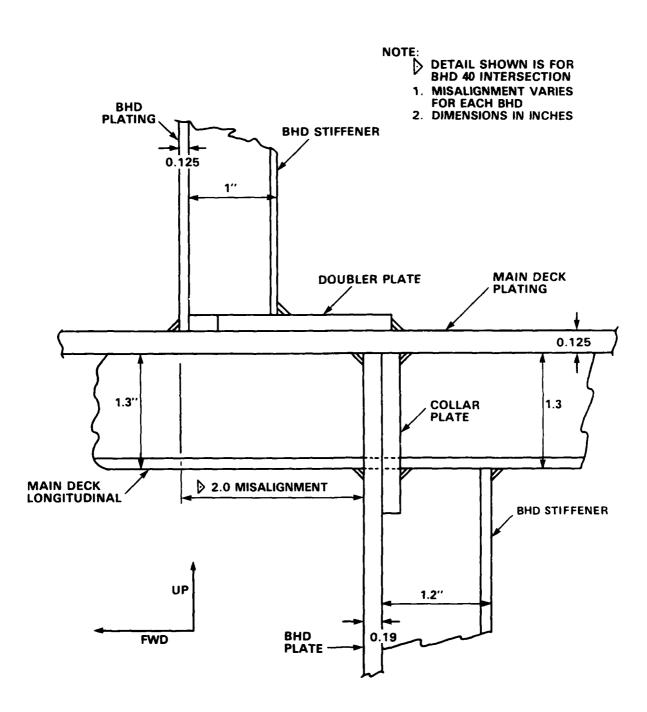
Bulkhead Misalignment at Intersection of Main Deck and Bulkheads Interior to Deckhouse
